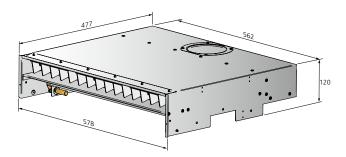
Dimensional drawing excl. grille & leakage indicator, sleeve connection side 5.
